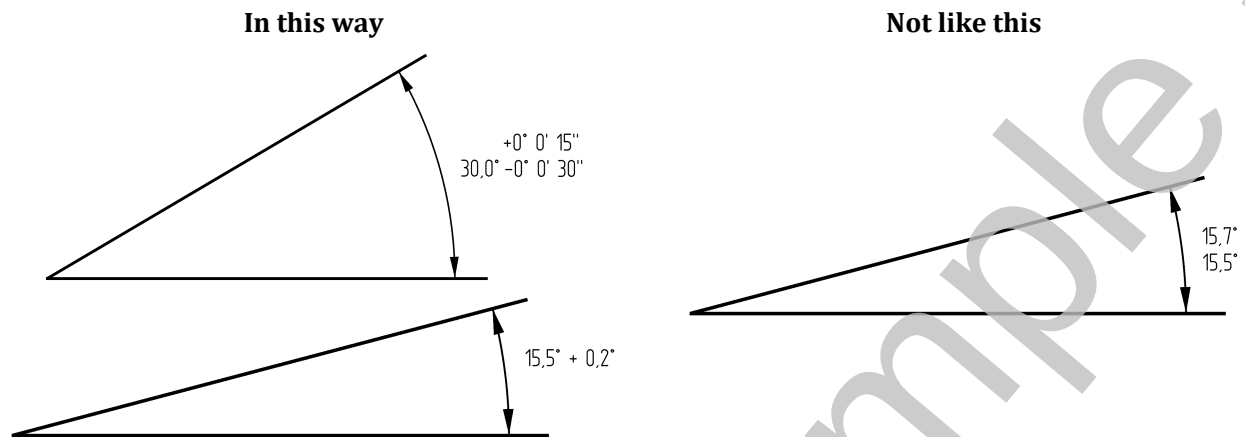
Inscription of tolerances of angular dimensions
